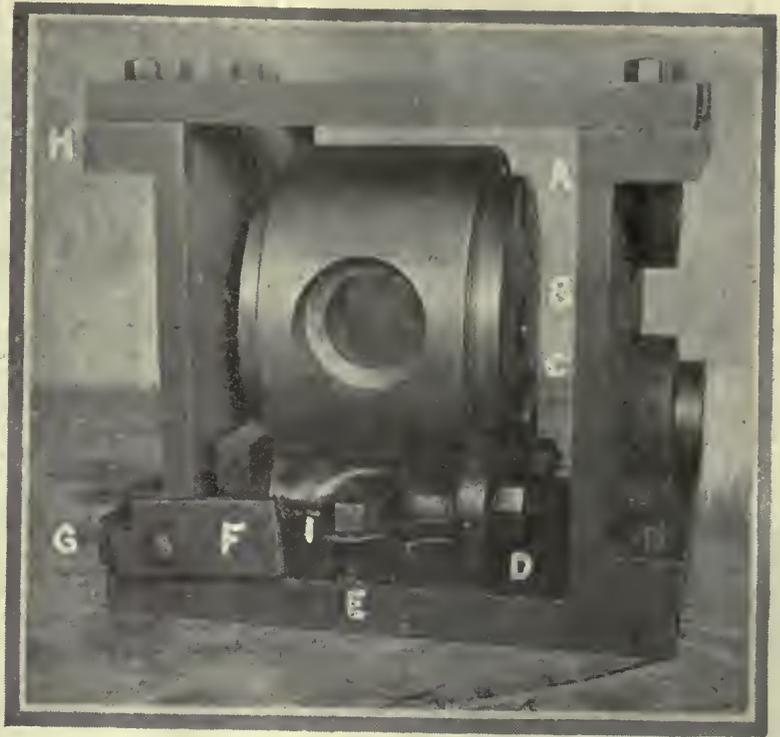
THE DRILLING JIG FOR DIVIDING HEAD.
